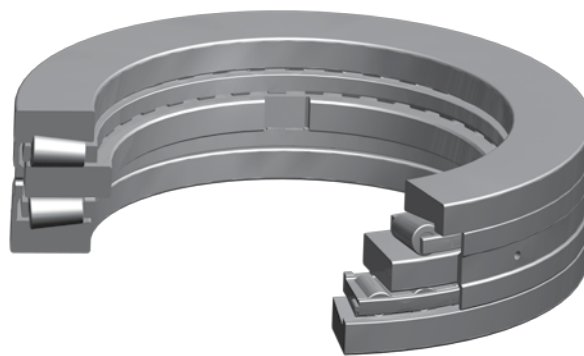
Type TTDFLK double-row thrust tapered roller bearing.
